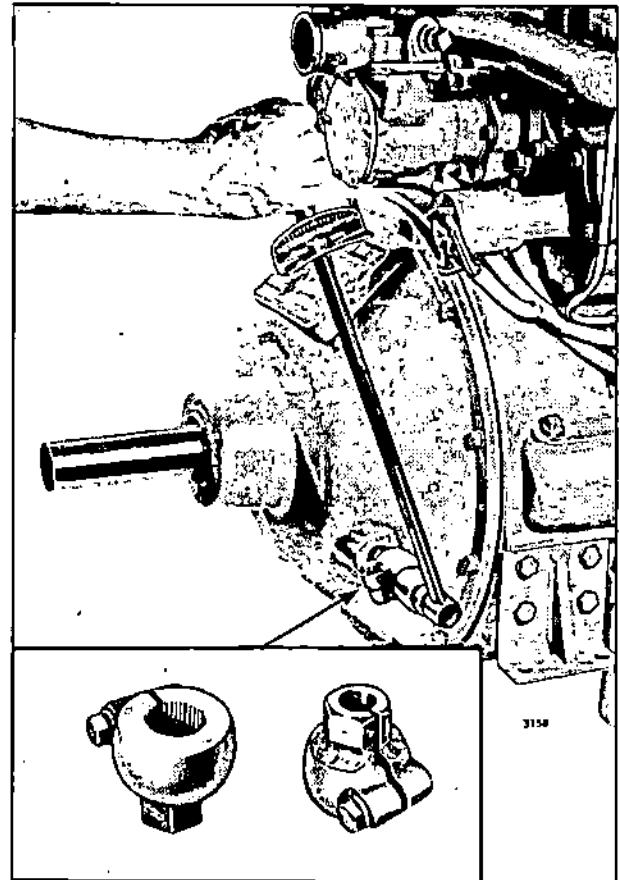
Power Take-Off Clutch Adjustment Check With Torque Wrench and Adaptor
